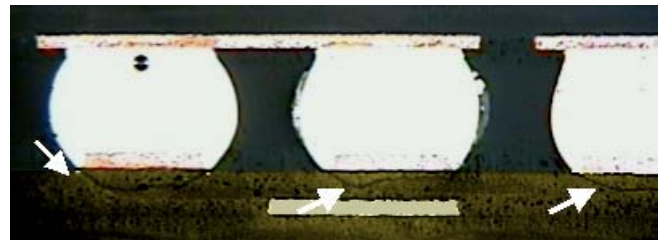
Cracked resin layer under pads for several solder joints, edge bonded
